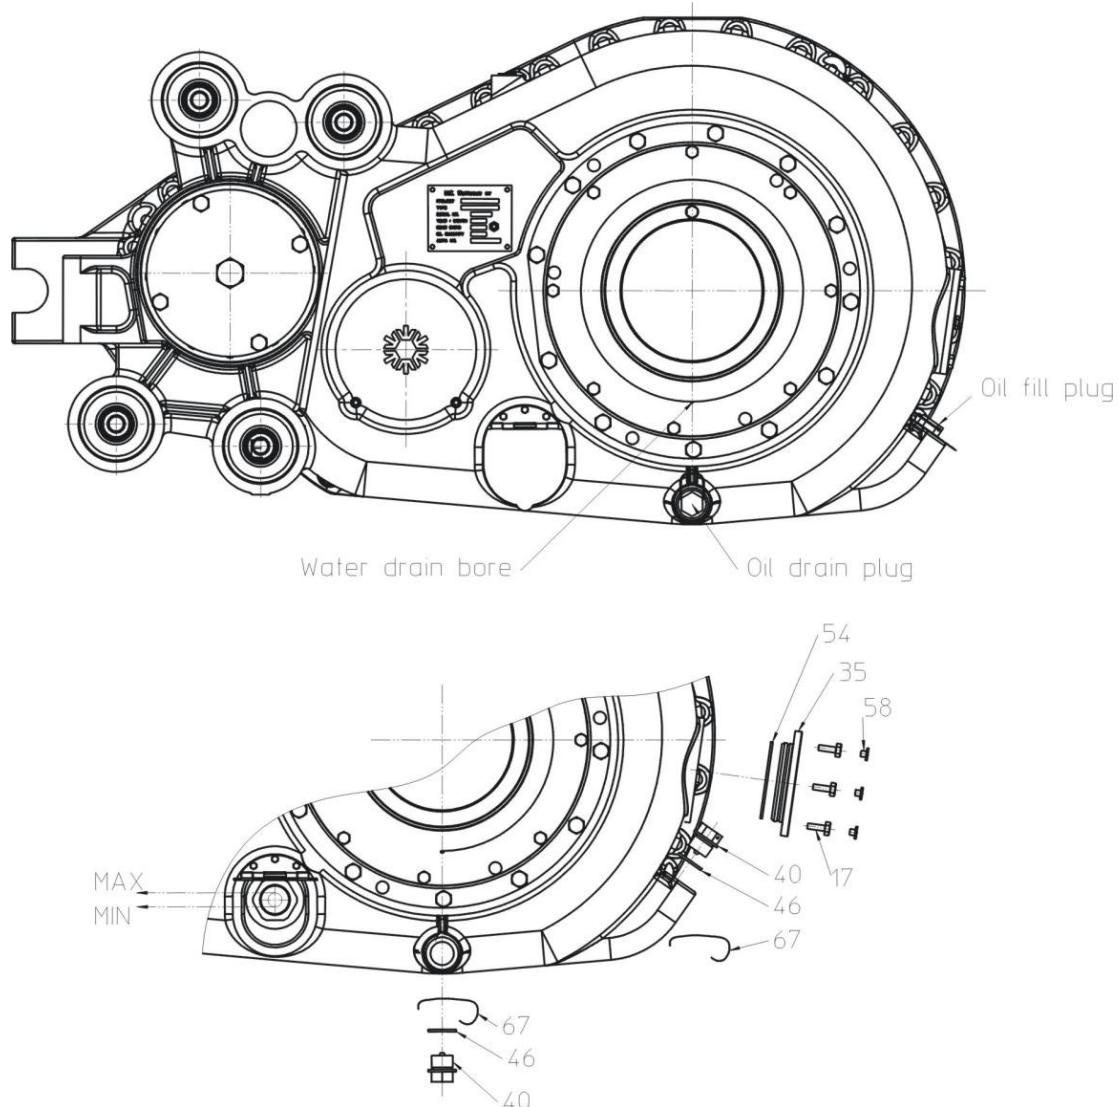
GEAR UNIT - OIL CHANGE/REFILL
